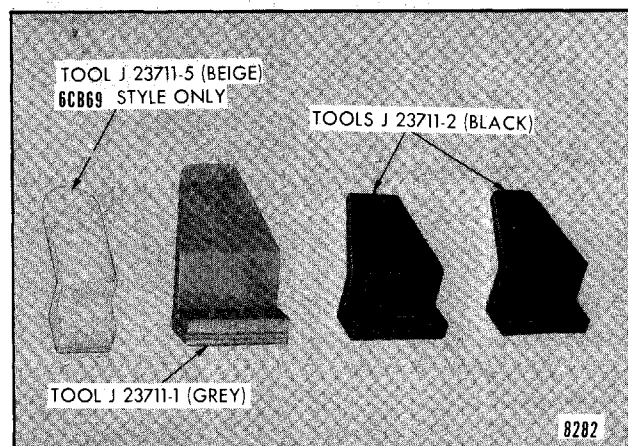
Glass Alignment Gauge Blocks - Tool J-23711 or Equivalent (Set of Four Blocks) - "E" Styles
